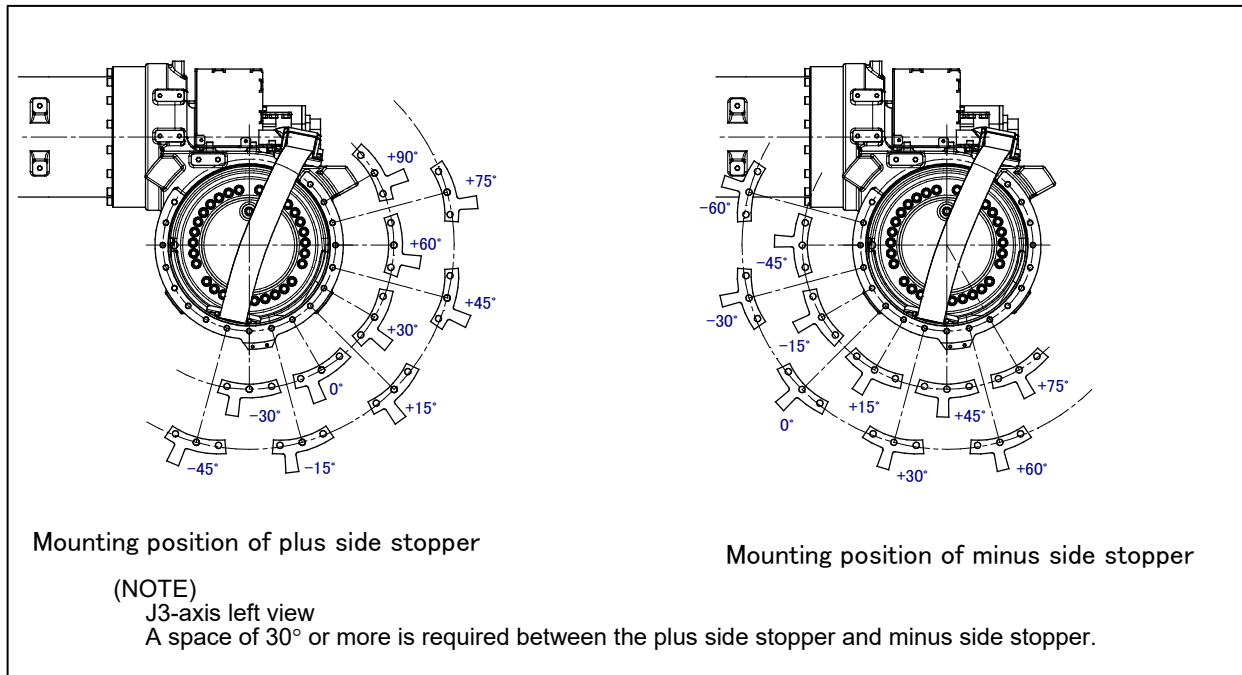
(n) Mounting the J3-axis mechanical stopper (R-2000iB/210FS/220US)
